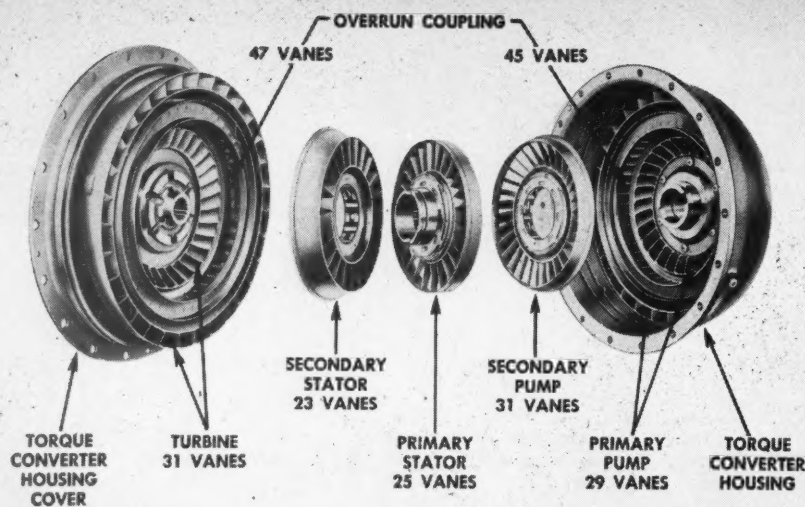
Hydraulic torque converter for the Powerglide automatic transmission, which consists principally of a turbine, primary and secondary stators, primary and secondary pumps, and over-run couplings
